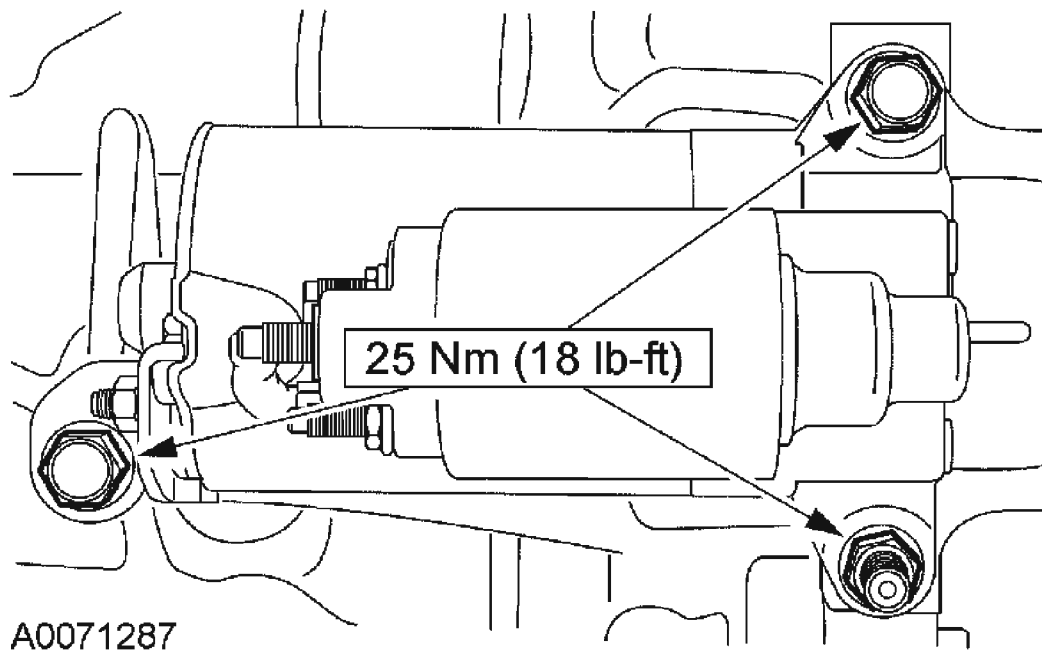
Removing 3 Starter Motor Bolts And Starter Motor
